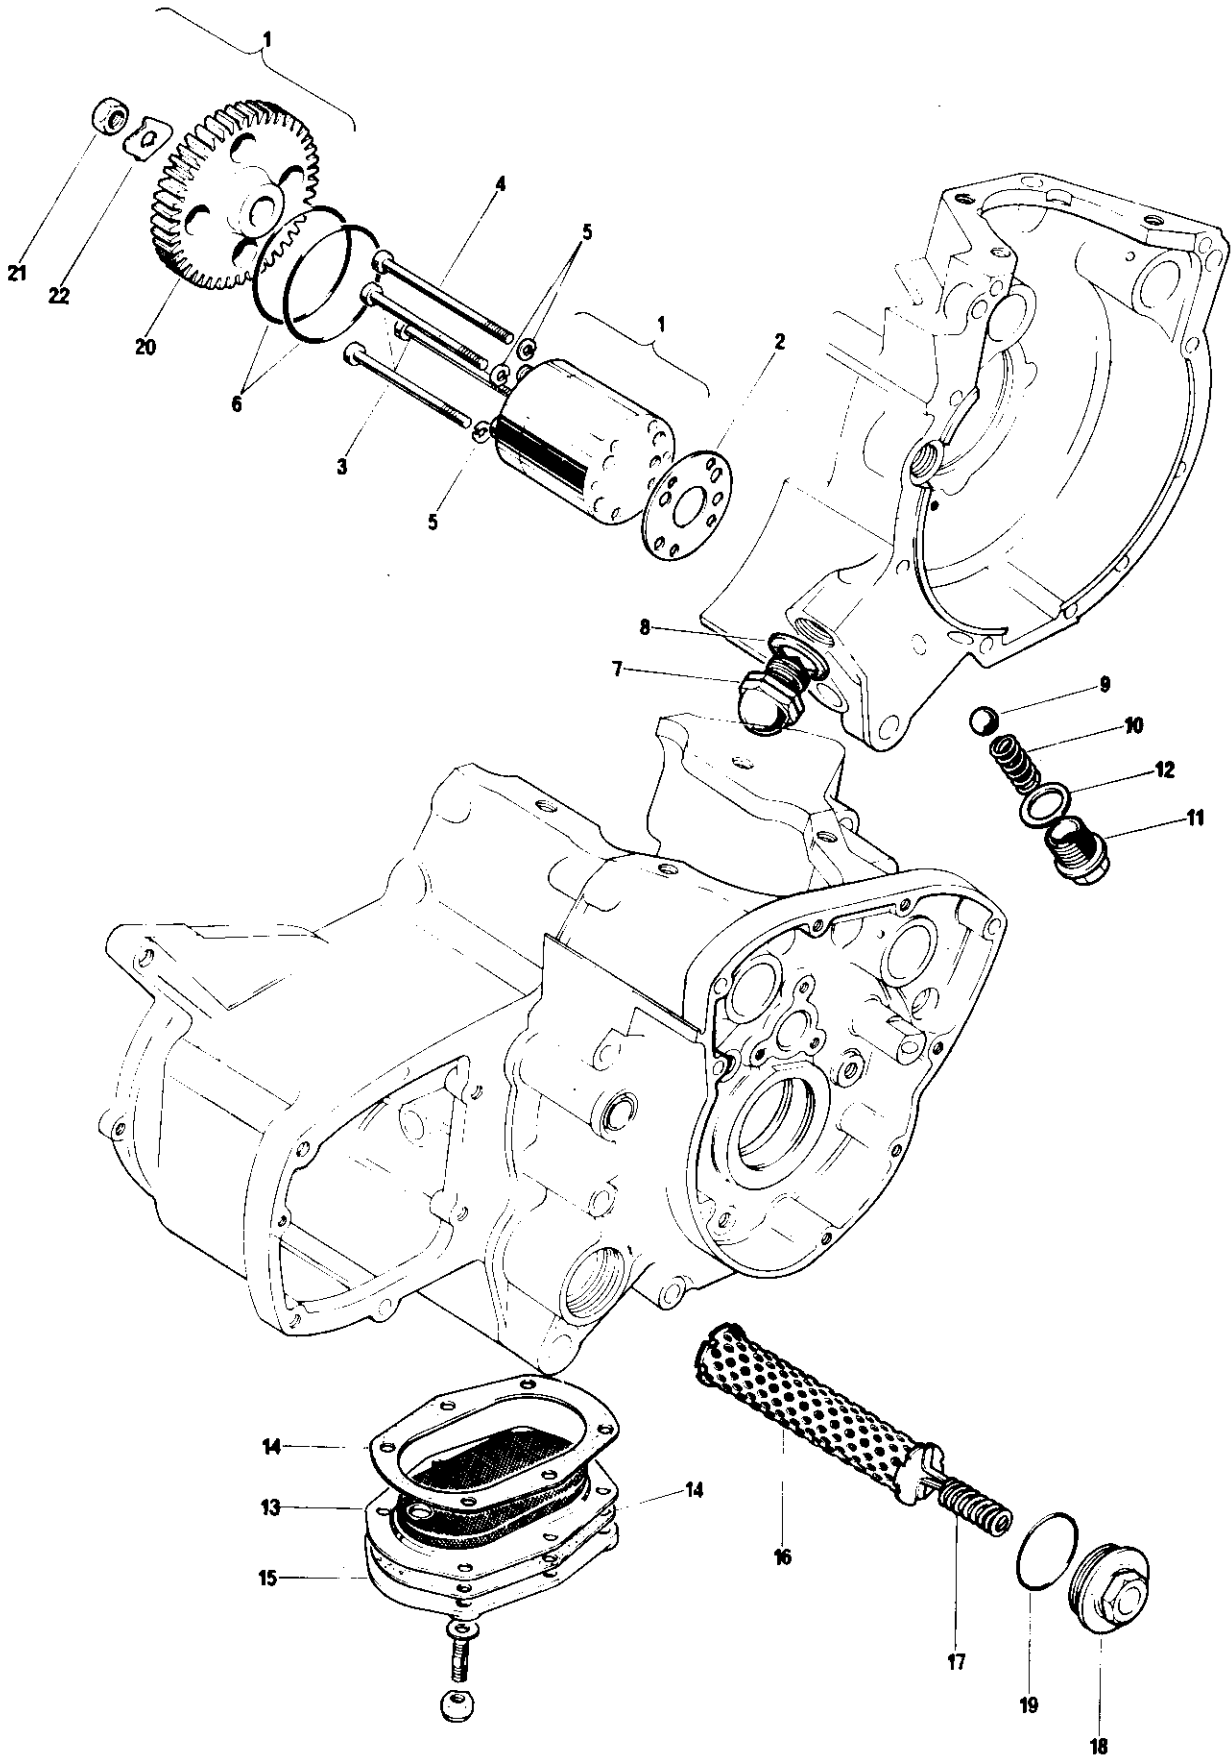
OIL PUMP AND CRANKCASE FILTERS
